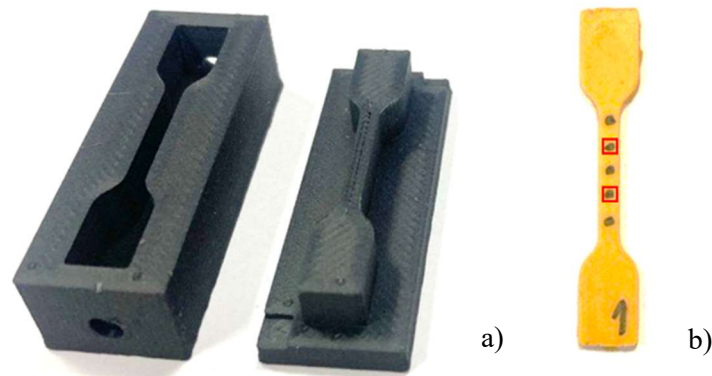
3D printed mold used for specimen preparation a), uniaxial tensile specimen with markers for deformation evaluation b); those marked in red in were employed for deformation tracking.
